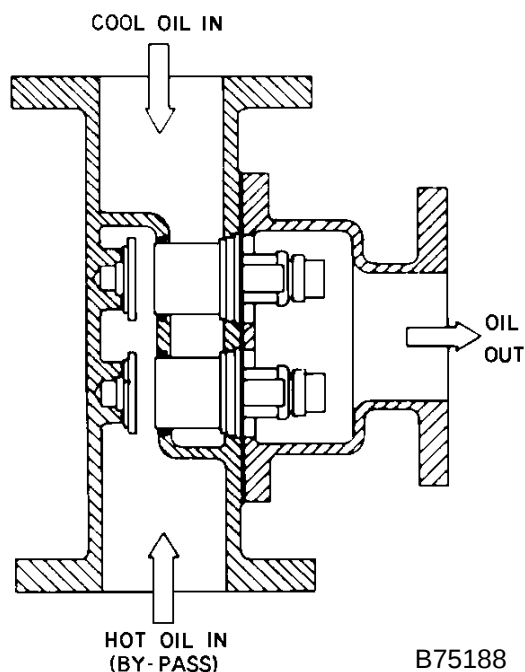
THERMOSTATIC MIXING VALVE ELEMENT
